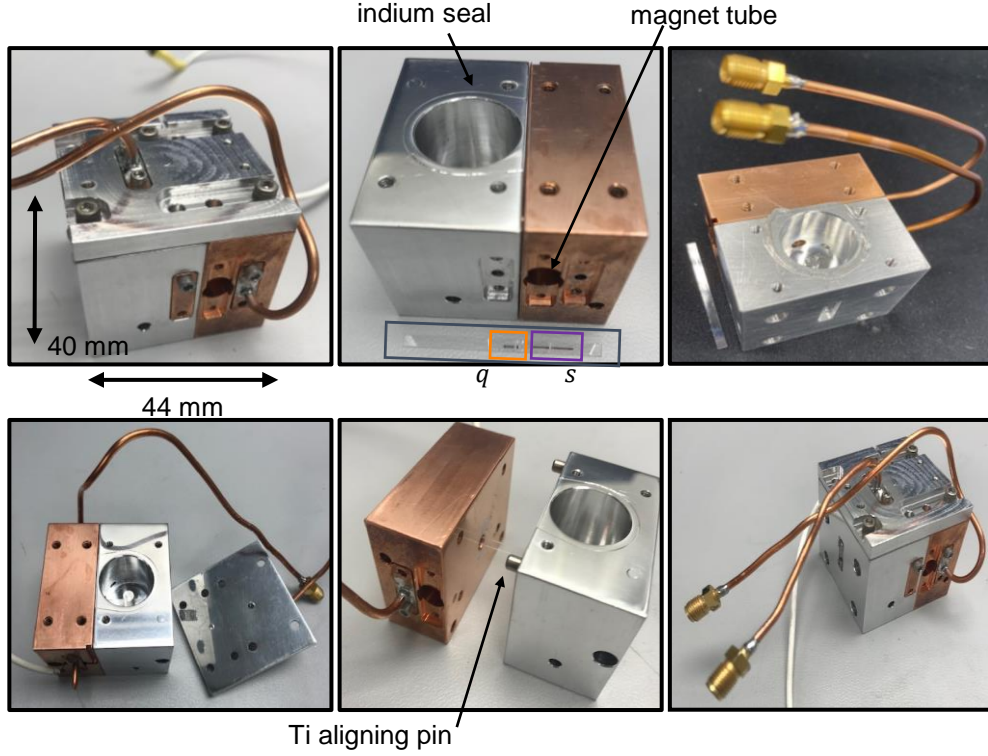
Photos of device The cavity housing was machined out of 6061 superconducting aluminum. The adjoining copper block is made of OFHC with a tube opening perpendicular to the cavity. The microwave ports are designed to be $50\ \Omega$ with stripped copper cable, so the pin length is variable. An indium seal gasket surrounds the top of the cavity to fill any gaps at the cavity-lid interface. The sapphire chip is held in place with a molybdenum screw. Titanium dowel pins are used to align the Al-Cu joint. The slit for the chip (which spans the Al and Cu, and must go through the central $\lambda/4$ cavity post) is laser cut to be precise and made in a singular cut to be perfectly aligned.
